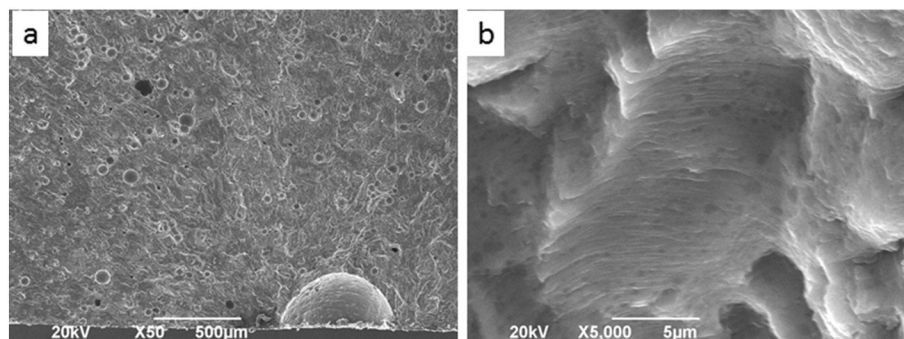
Fracture morphologies of welded joints under 80% humidity. (a) Crack source zone; (b) crack propagation zone.
